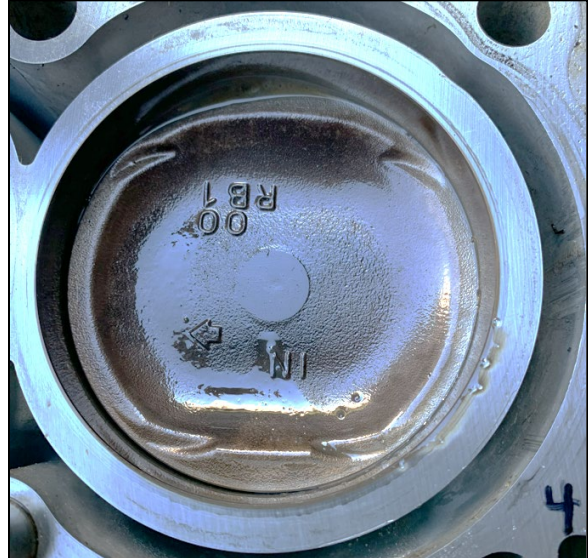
View of engine components as observed during the teardown. No. 4 cylinder valves.
